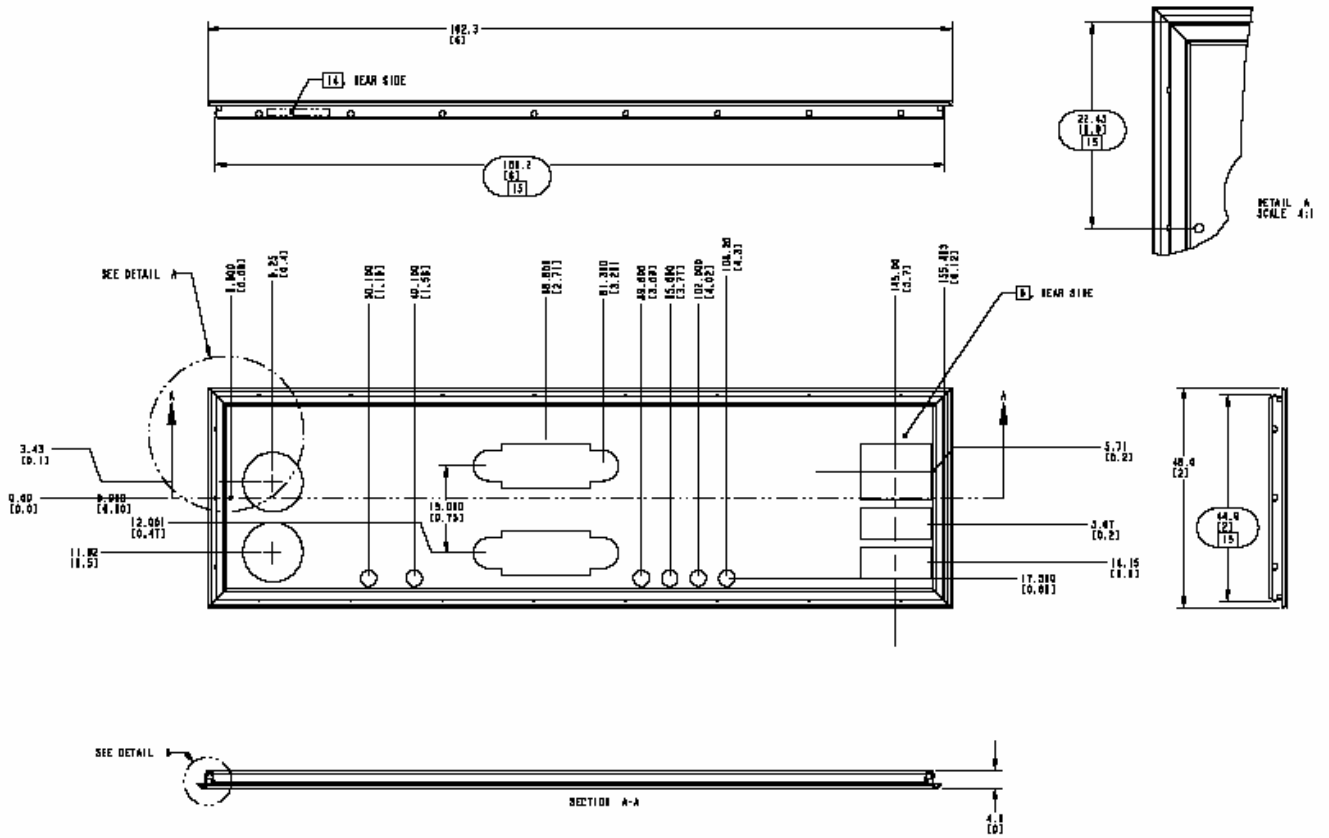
SKU 1 Pedestal Mount I/O Shield Mechanical Drawing
